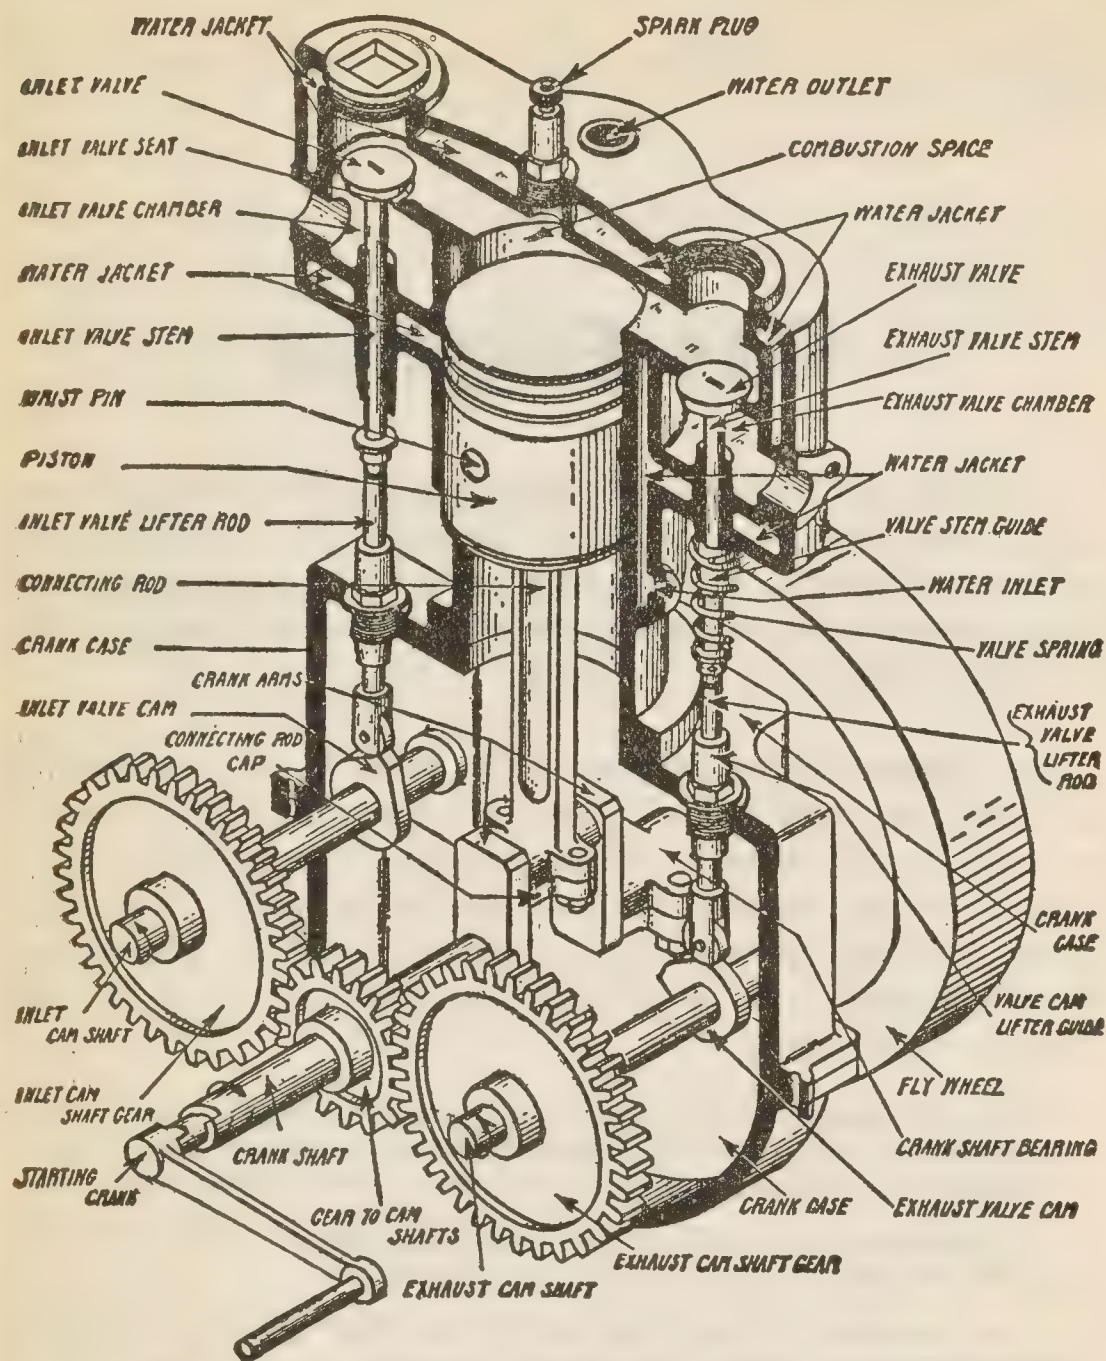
,068.—Sectional view of a four cycle gas engine, showing the valve gear and other working parts. Both inlet and exhaust valves are mechanically operated. The location of the valves diametrically opposite each other requires a separate cam shaft for each. These cam shafts are geared to the engine crank shaft and they make one revolution to every two of the engine. When the inlet valve is operated by a spring and the engine suction, only one cam shaft is necessary, as shown in fig. 10,069.
